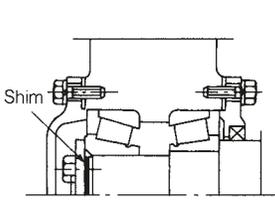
DB Arrangement With Clearance Adjusted by Inner Rings.
